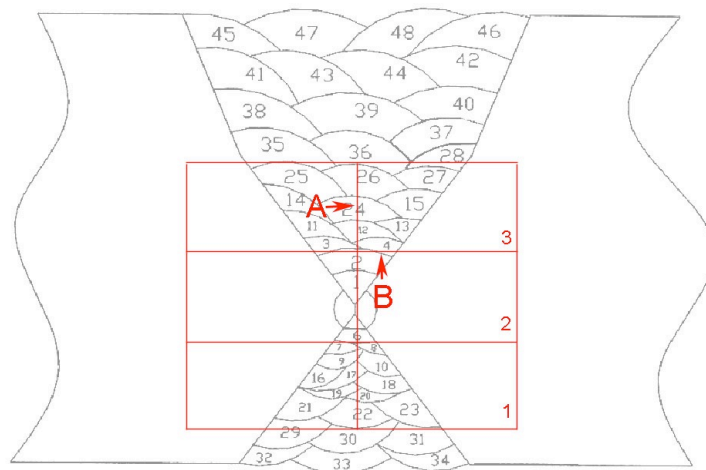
Schematic showing the locations of the three samples cut from the weld.
